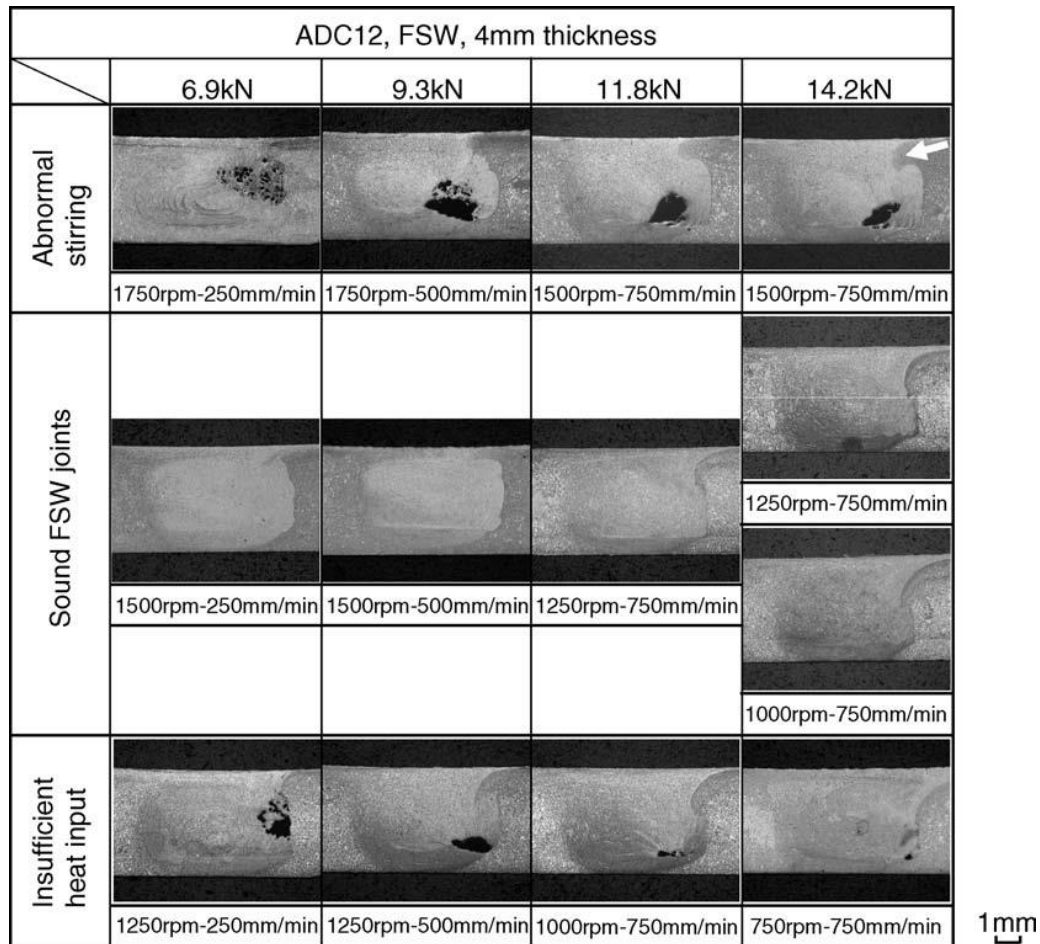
FSW of ADC12 showing various weld cross-sections with various weld qualities [117].
